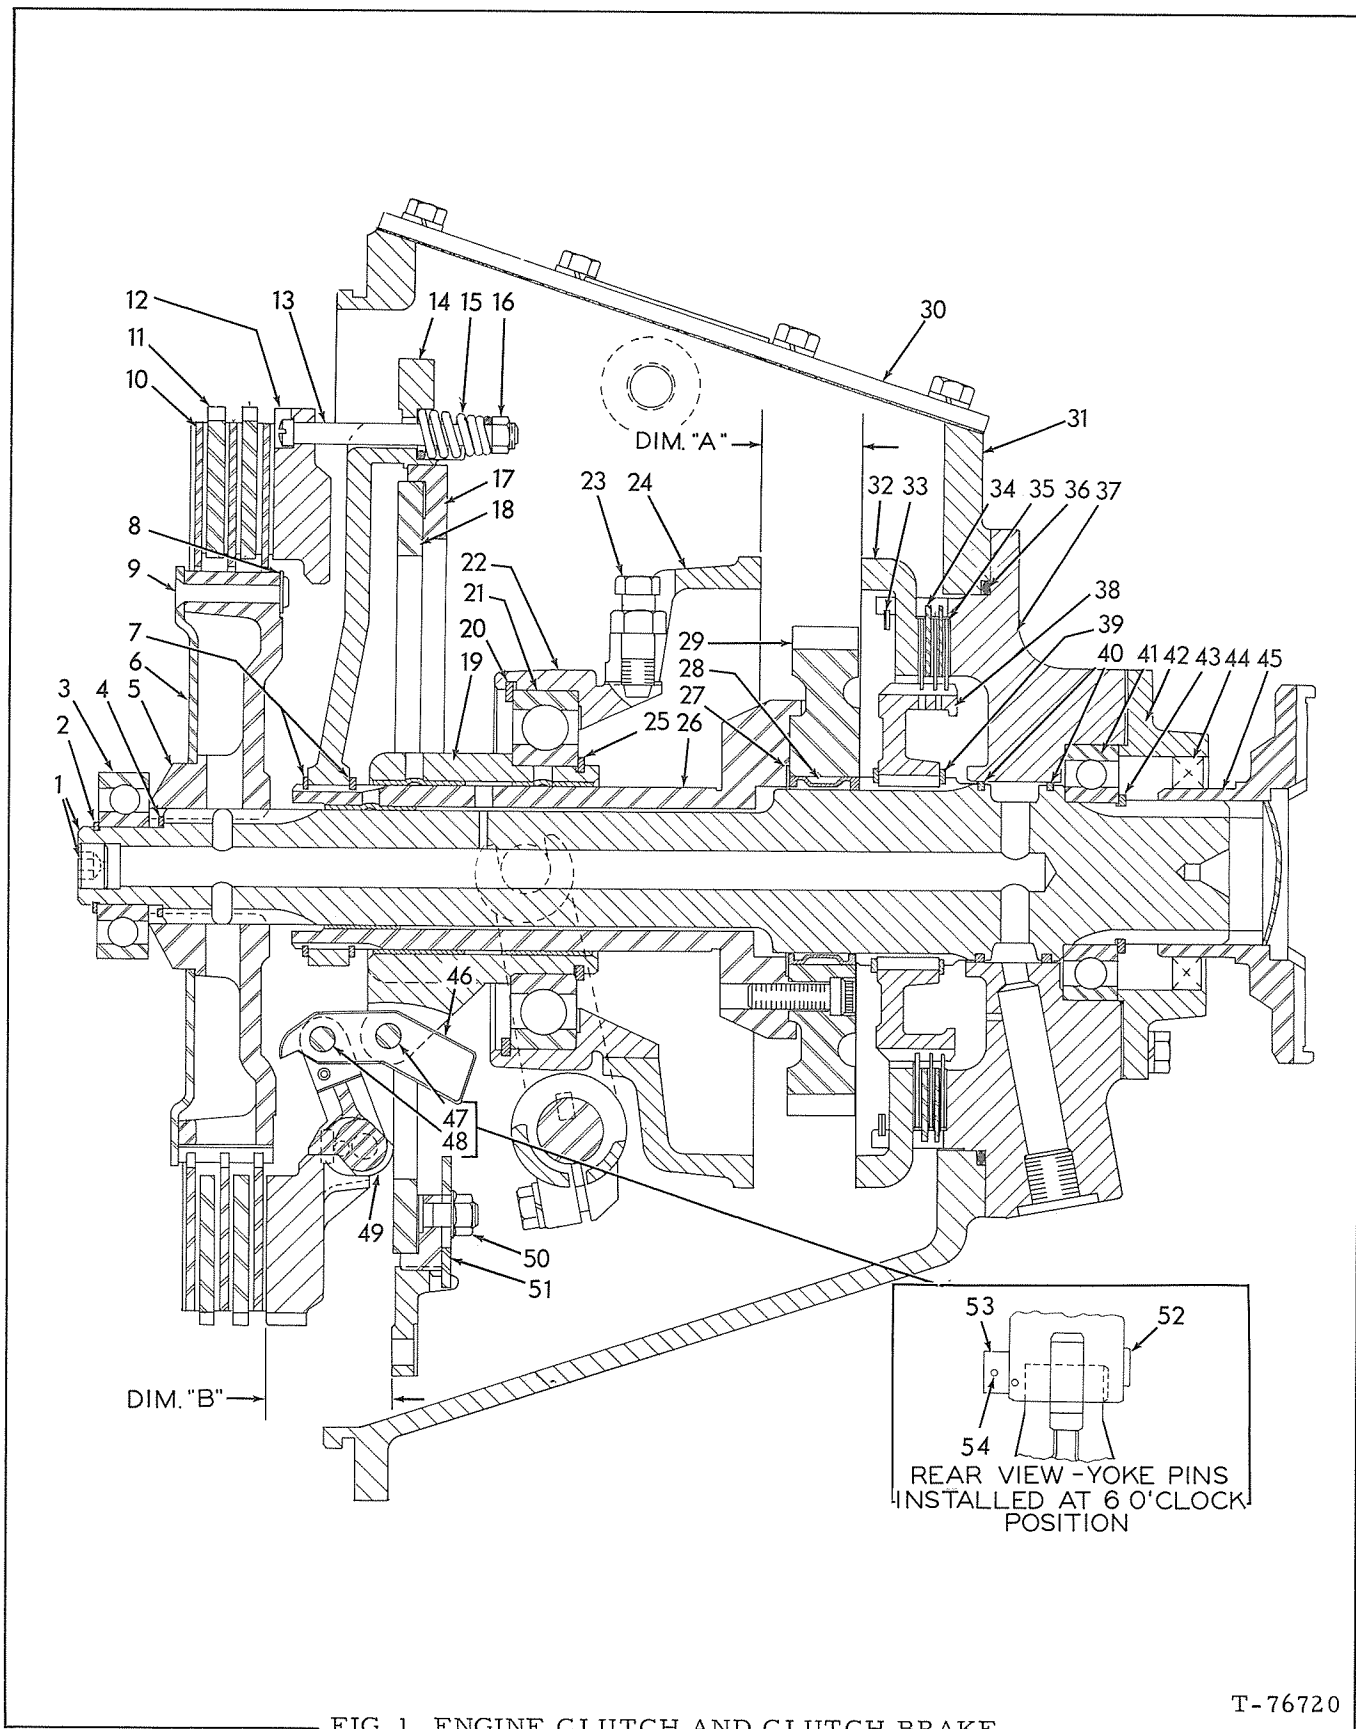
ENGINE CLUTCH AND CLUTCH BRAKE
